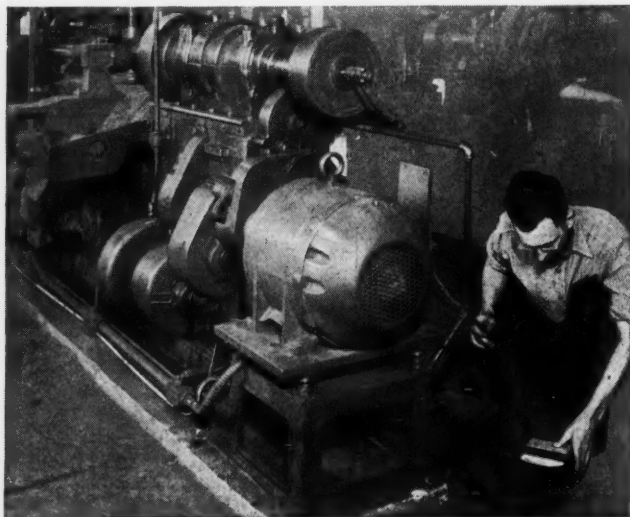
Application of totally enclosed fan motor to machine tool.
